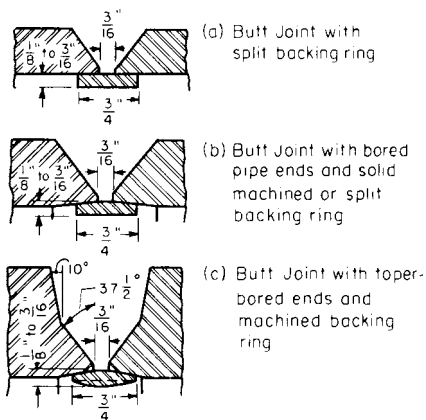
Recommended backing ring types. (a) Butt joint with split backing ring; (b) butt joint with bored pipe ends and solid machined or split backing ring; (c) butt joint with taper-bore ends and machined backing ring.
